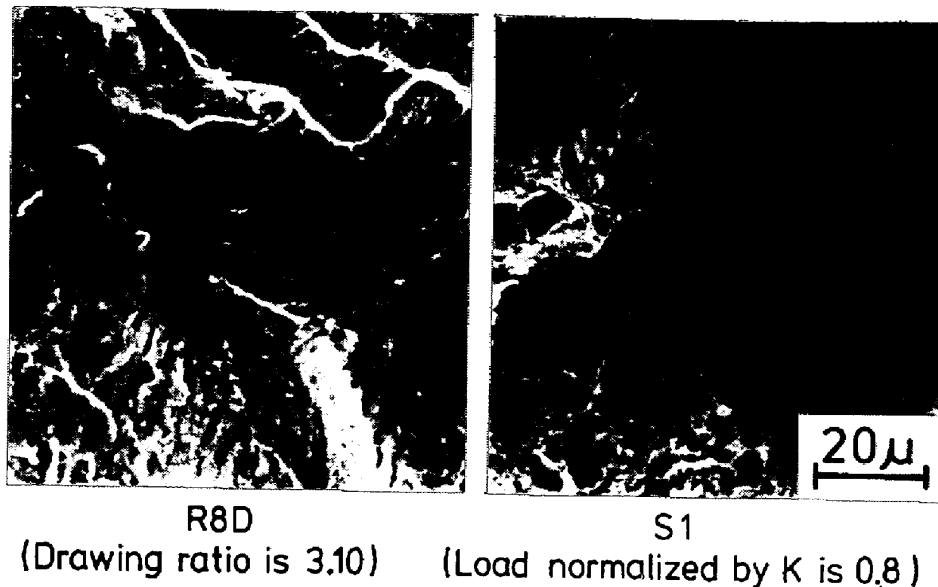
Fractographs of season cracking and delayed cracking.
